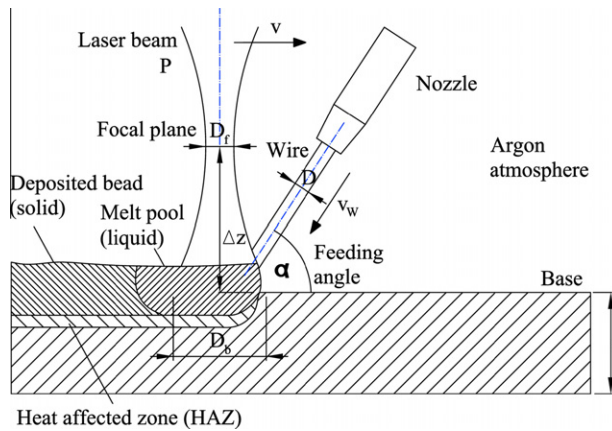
Schematic drawing of the wire-feed deposition process used for the manufacture of the Ti–6Al–4V blocks.
